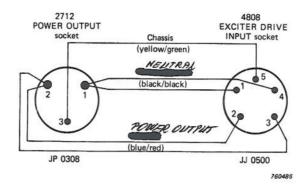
Drive Cable AQ 0095. Soldering side of plugs shown
